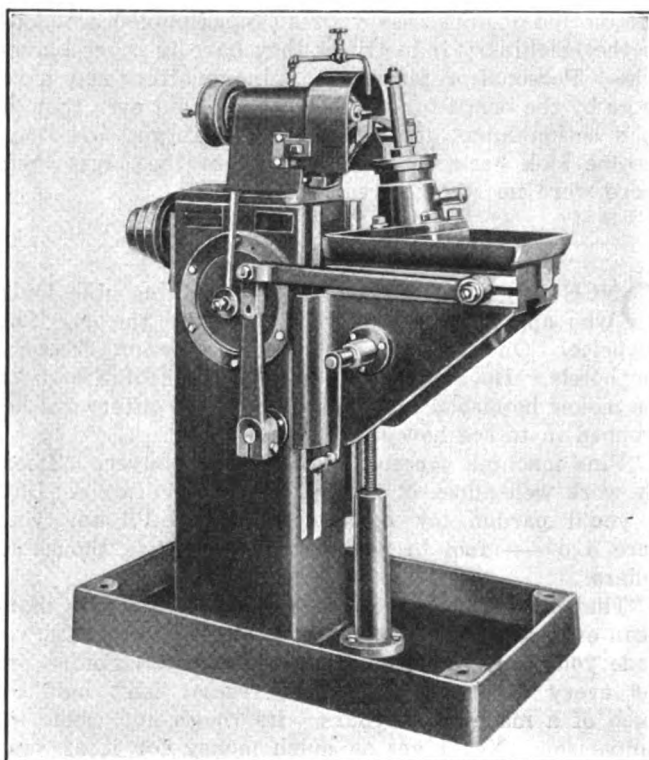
GROSS GEAR-TOOTH ROUNDING MACHINE
